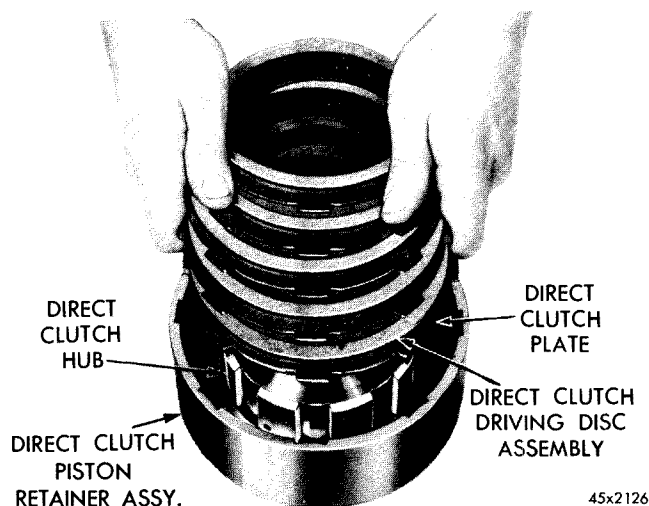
Installation of Clutch Plates and Clutch Driving Discs
